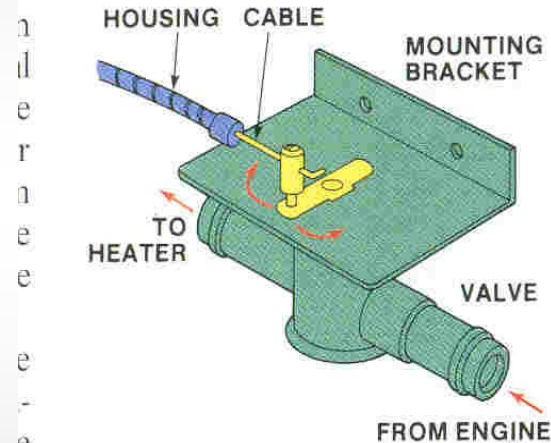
Cable-operated heater valve used to control the flow of water or coolant through the heater core.
